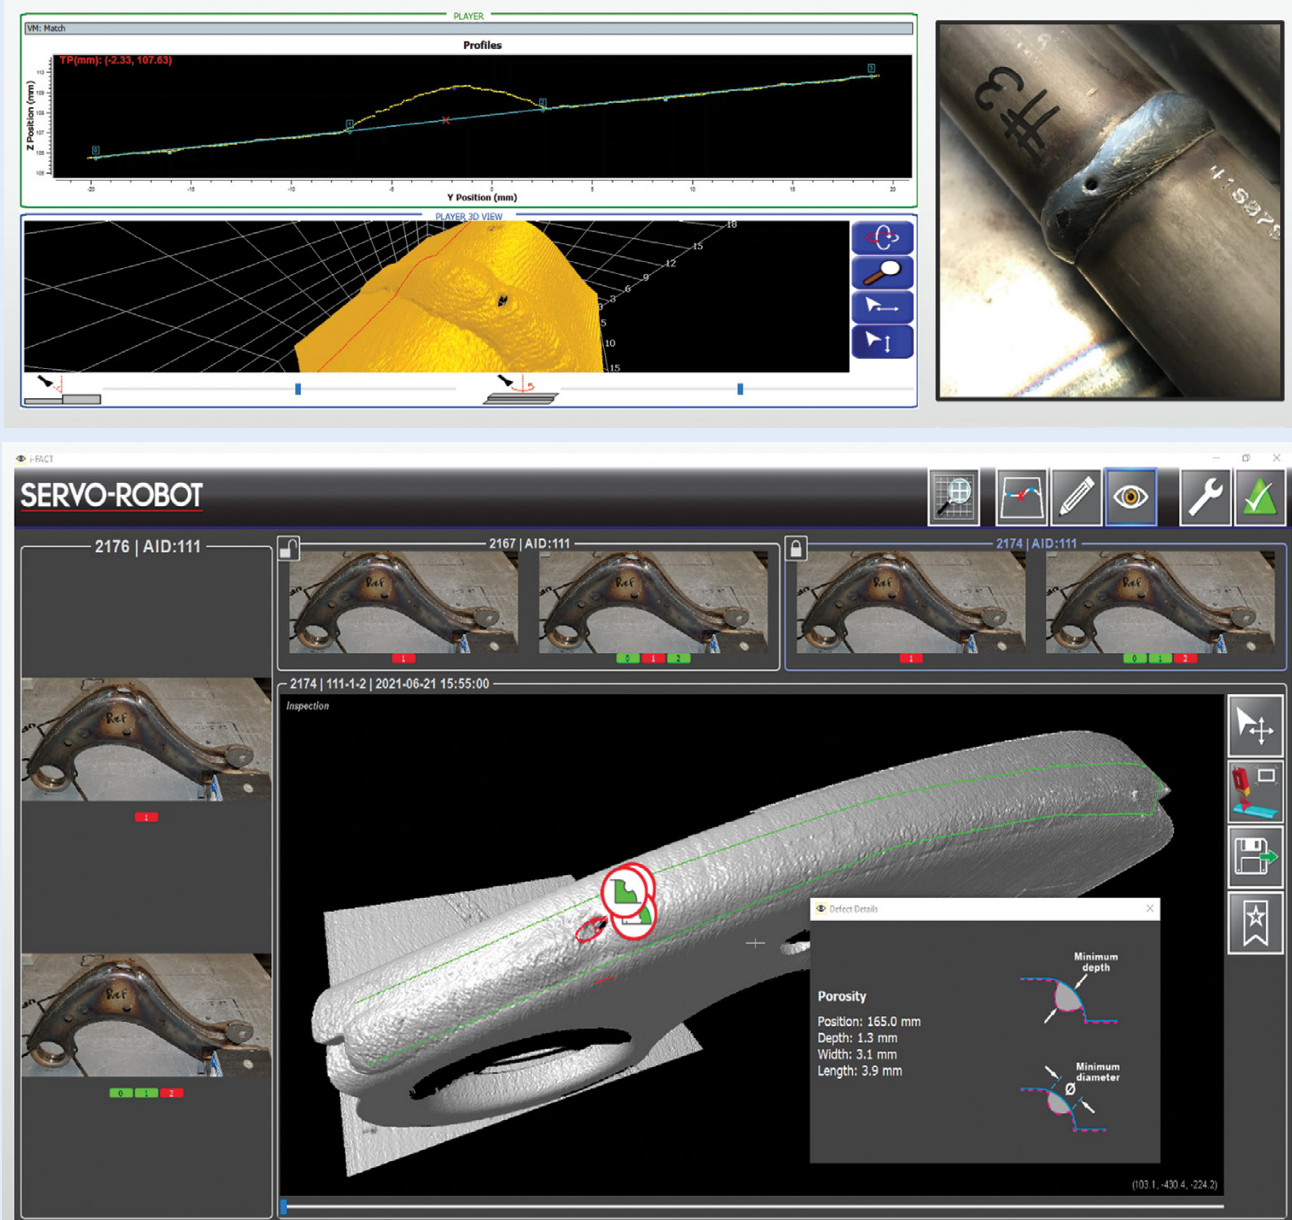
Using 3D laser vision, the system can continuously measure weld geometry across the entire joint, capturing height, width, toe angle, and surface defects with quantitative precision.
